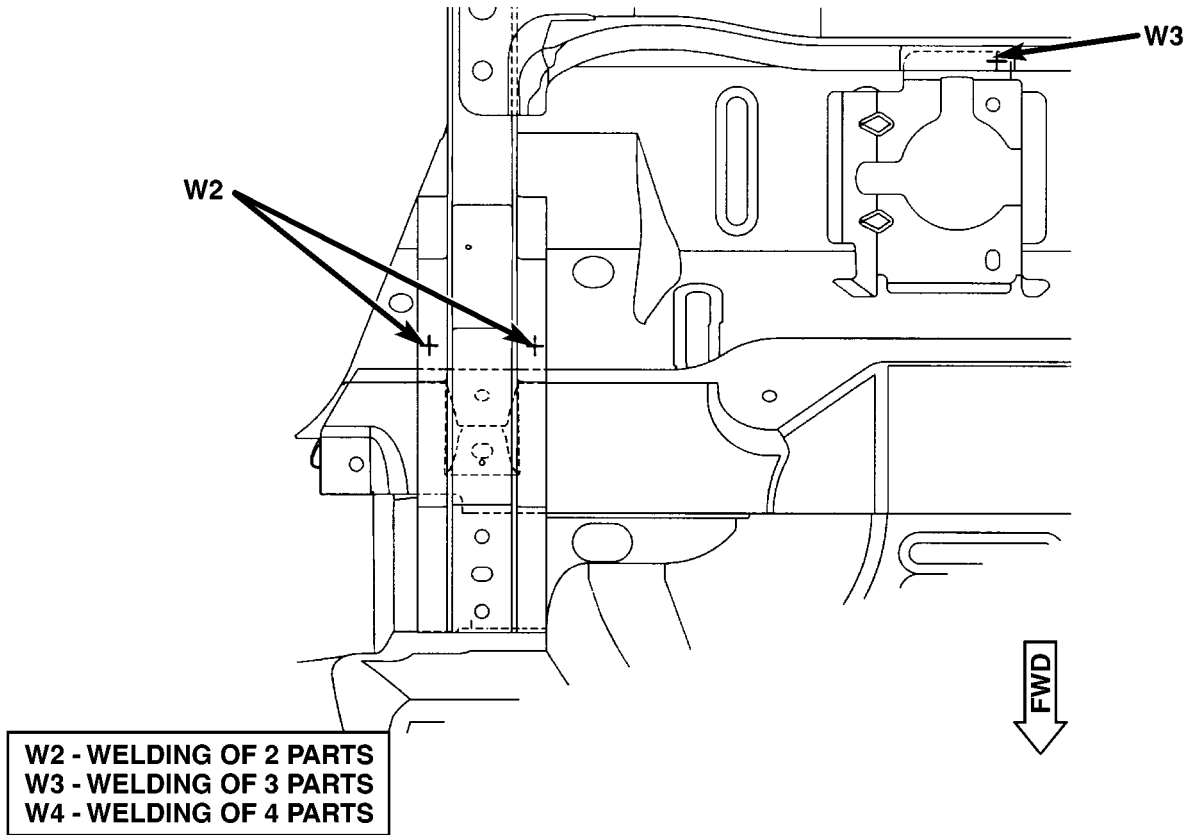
FUEL TANK SUPPORT TO REAR SUSPENSION CROSSMEMBER & SIDE RAIL EXTENSION TO REAR FLOOR PAN
